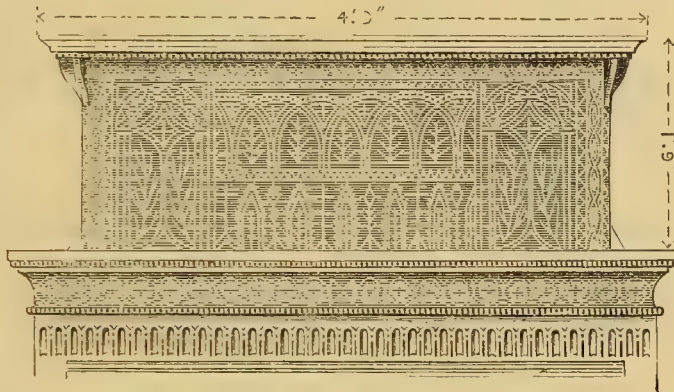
BACKING ON TOP OF CABINET SHOWN IN FIG. 1.
